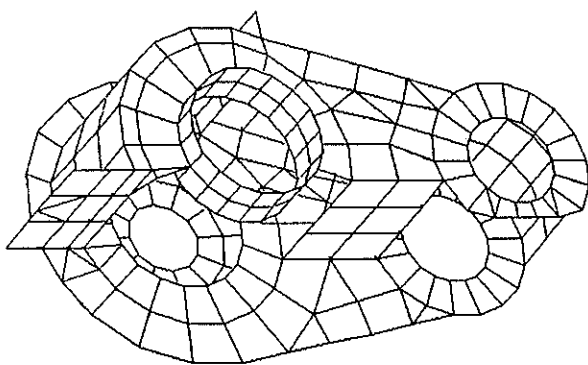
PLATE ELEMENTS, FRONT QUARTERING VIEW
